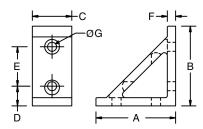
machined gusset, code 10-102, from the IPS catalogue [3]. In the drawing: A = 77mm, B = 77mm, C = 34mm, D = 20mm, E = 40mm, F = 8mm, G = 9mm.
